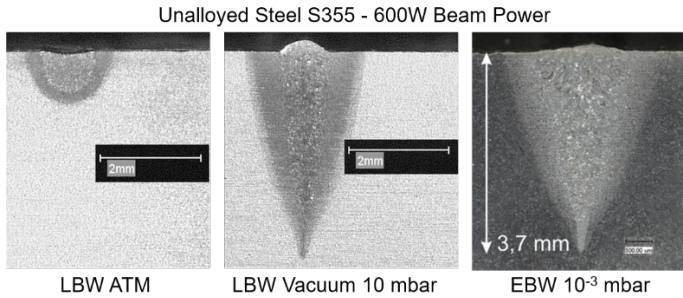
Initial results Laser beam welding under vacuum with 600 W beam power [4]
